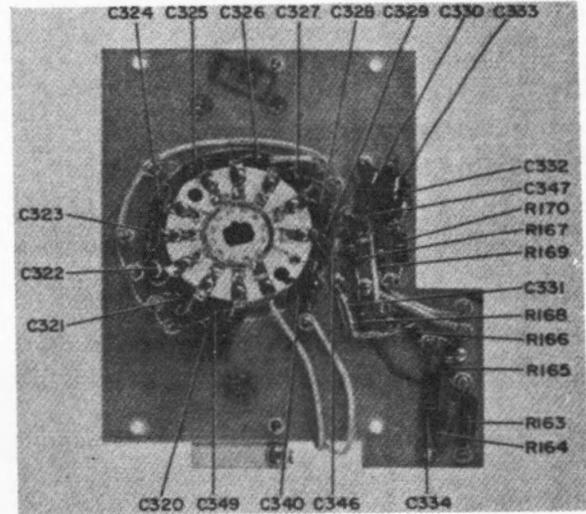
D. Signal Data Translator CV-1377A/PRC-47 (A3), VFO Subassembly, Card Assembly S7, Parts Location
